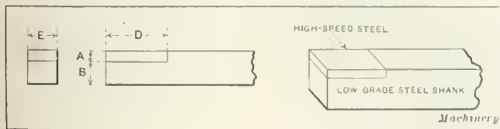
Fitting High-speed Steel Pieces to Low-carbon Steel Shanks
